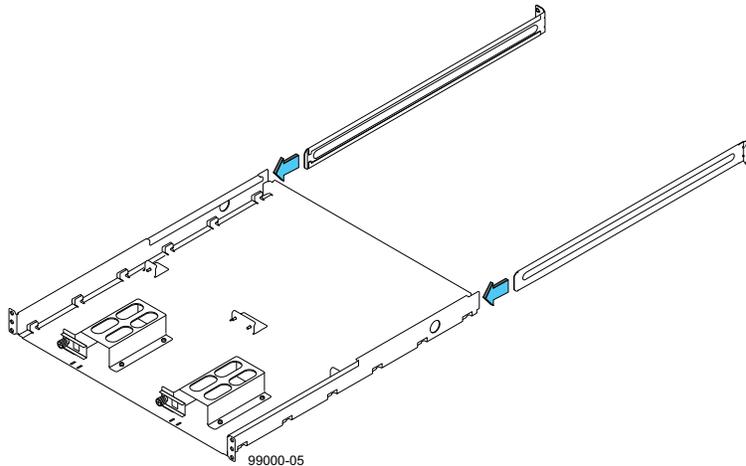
Mounting LSISAS6160 Switches on a Rack-Mounted Shelf
